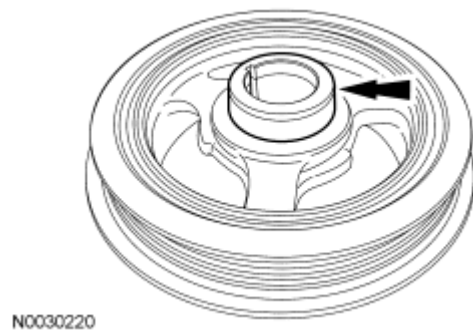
Lubricating Crankshaft Pulley Sealing Area With Clean Engine Oil
